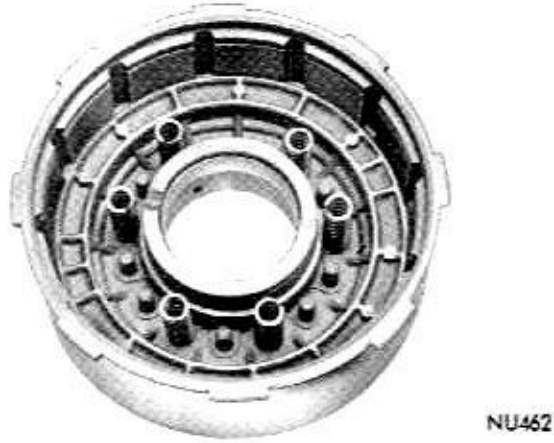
Front Clutch Piston Return Spring Location (6 Springs)
